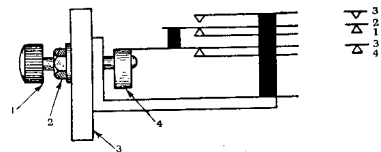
A jack of the same type as that of Figs. 15 and 16, but fitted with a knob and cam.
